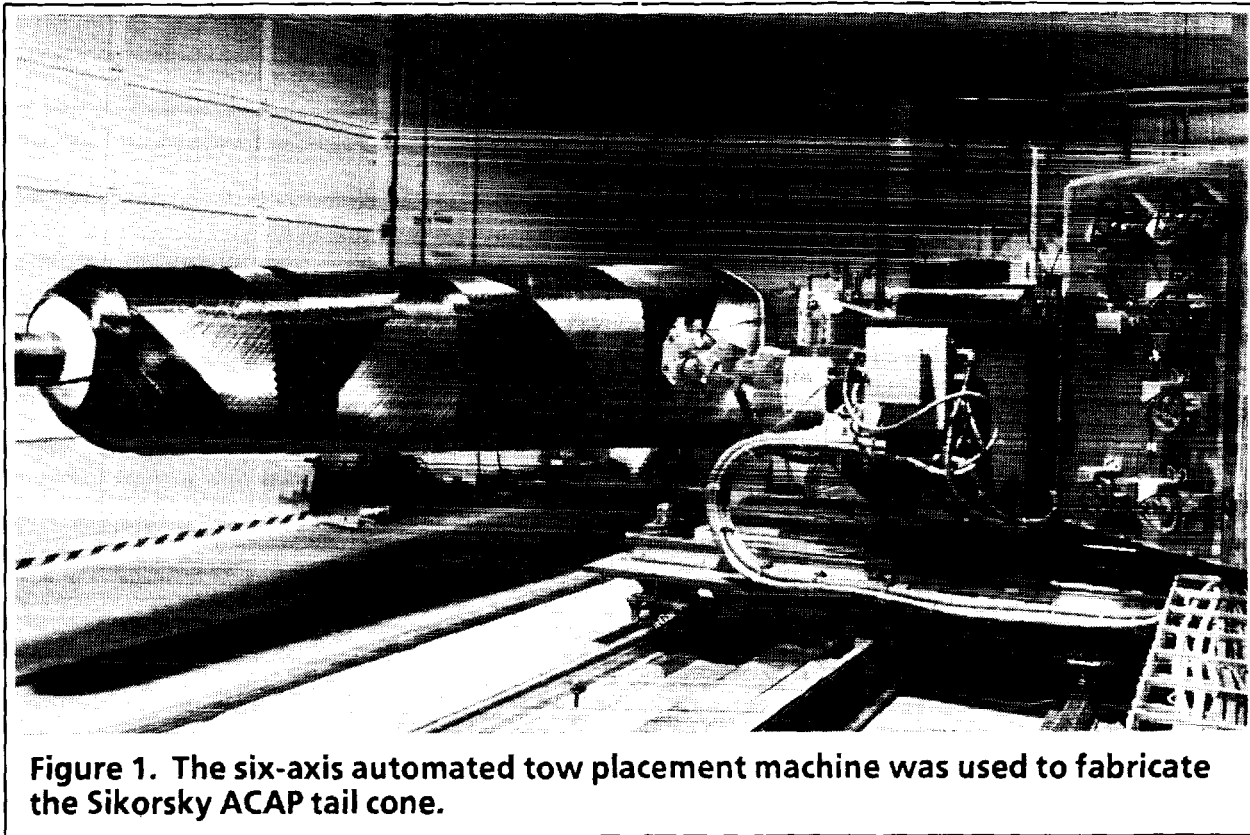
The six-axis automated tow placement machine was used to fabricate the Sikorsky ACAP tail cone.
